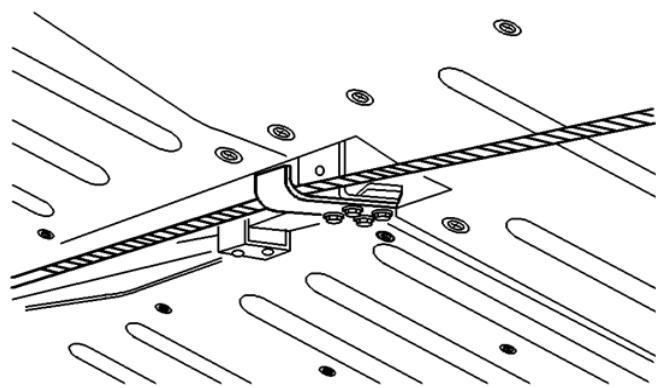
Static line anchor cables (Sheet 2 of 3)
